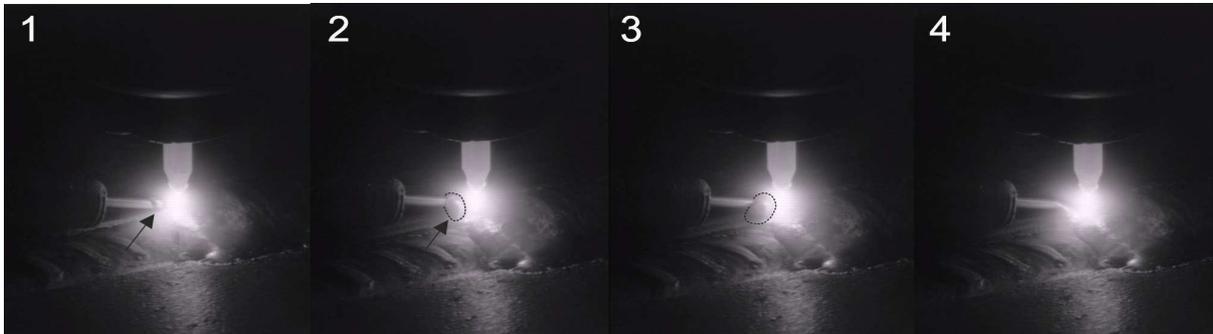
Welding process tracking in GTAW Thermic Pulsed (*Second pass*).
